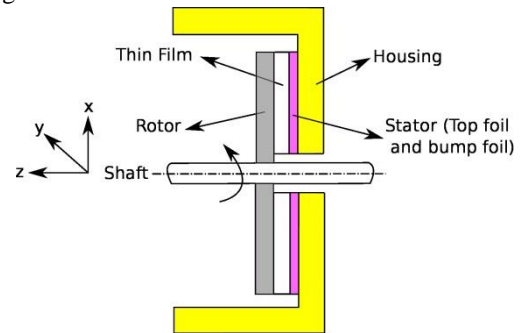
Schematic diagram of the layout of foil thrust bearings.
